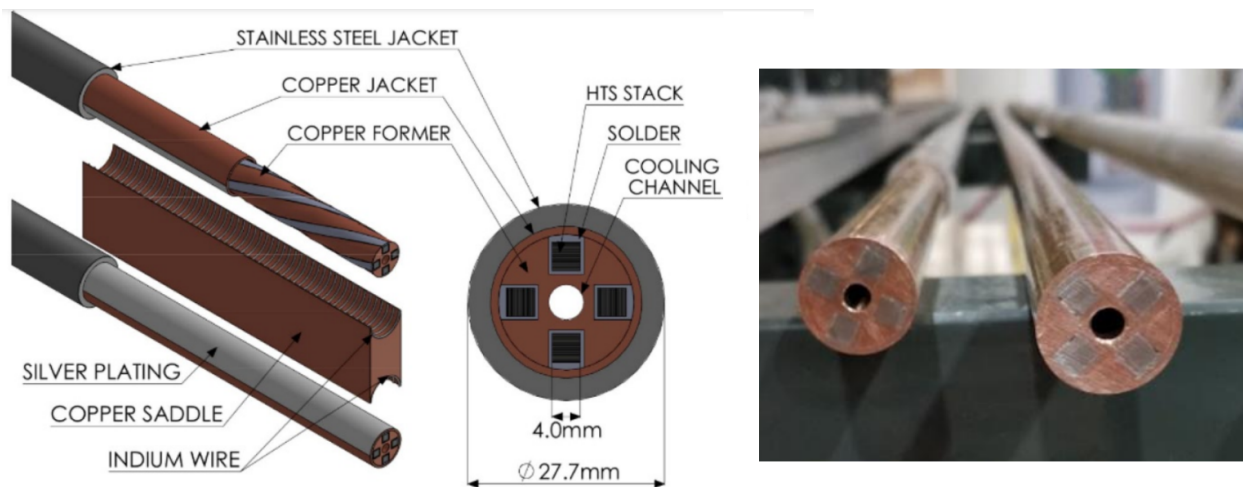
VIPER cable. Left: Schematic of the different components; including copper former with helical grooves and joint elements between two VIPER cables. Right: Cross section of two copper cores, with the stacks of HTS tapes visible [93].
